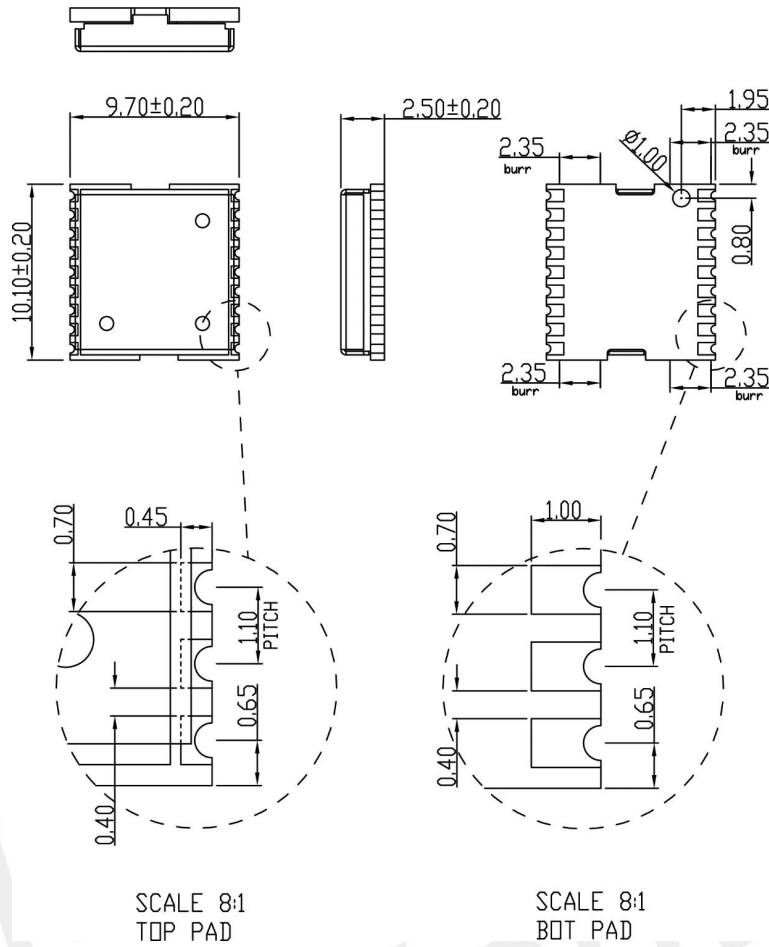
SIM66MD mechanical dimensions (Unit: mm)
